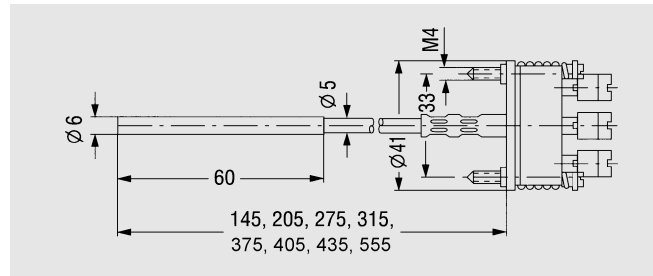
/27 Explosion protected measuring insert for resistance thermometers
